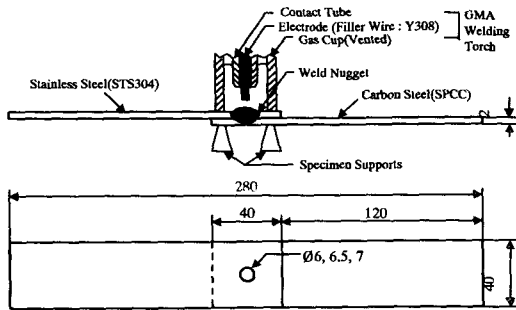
Specimen configuration and welding setup for Arc spot welding process.
